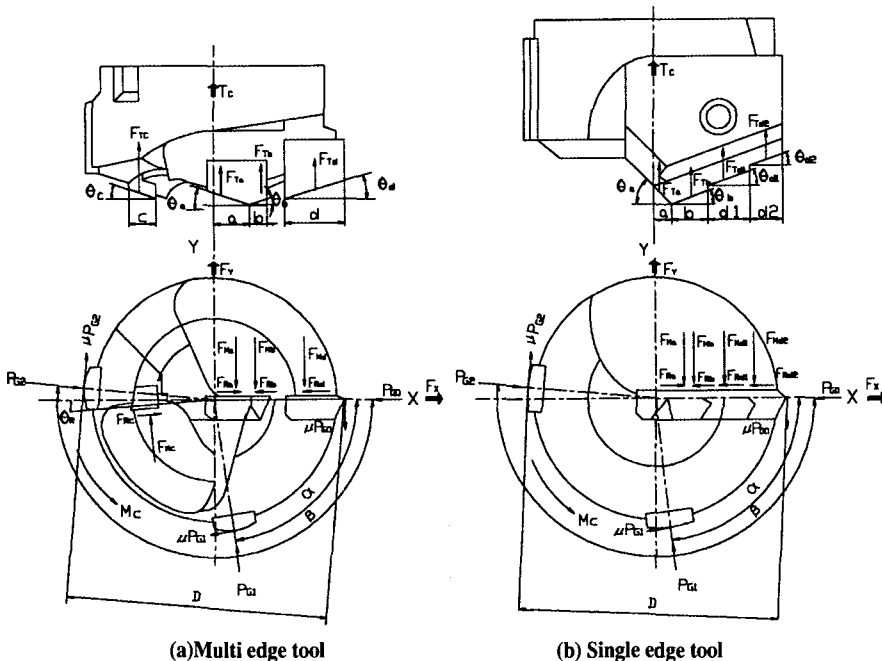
Forces acting on BTA tools with multi edge and single edge
